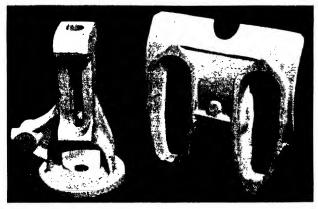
(Left) Guide Bracket, and (right) Rocker Gear Cover Castings for Aircraft Engines (Magnesiam Castings & Problets, Ltd.)
